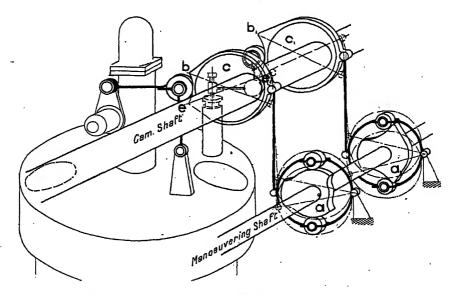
Diagram of Early Type of Sulzer Reversing Gear.
